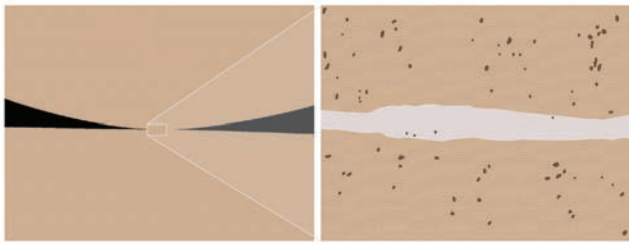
Welding zone. Left: Section of the welded tip (top) onto the pin (bottom). Right: Detail of the welding zone showing the formation and solidification of molten metals forming an alloy. Image credit: ABB.
